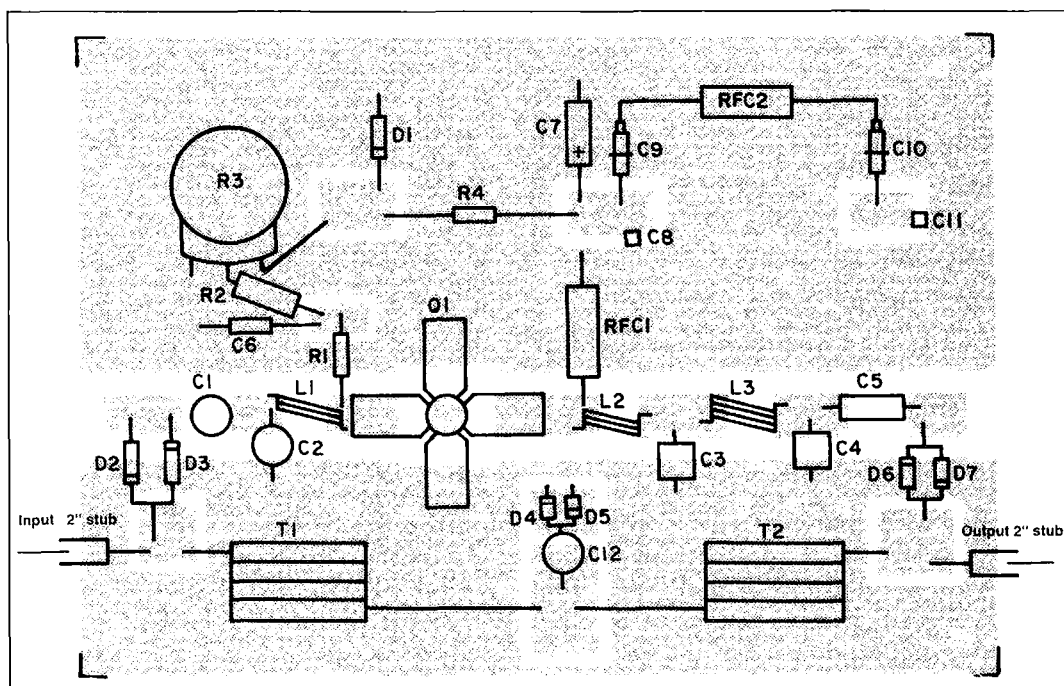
Parts placement. Mount components directly to the etched side of the PC board.
